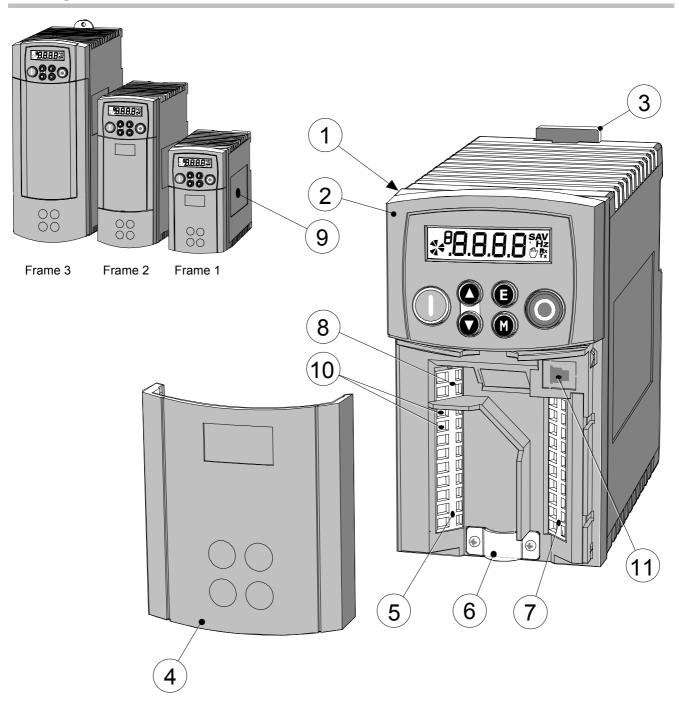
View of Component Parts (Frame 1 illustrated)
